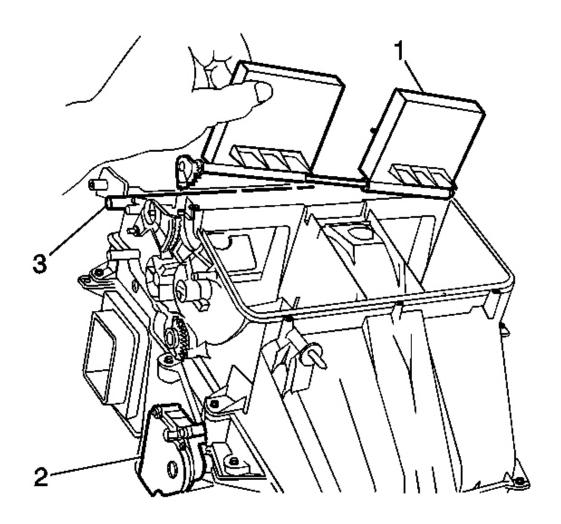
Removing/Installing Mode Door Courtesy of GENERAL MOTORS CORP.
